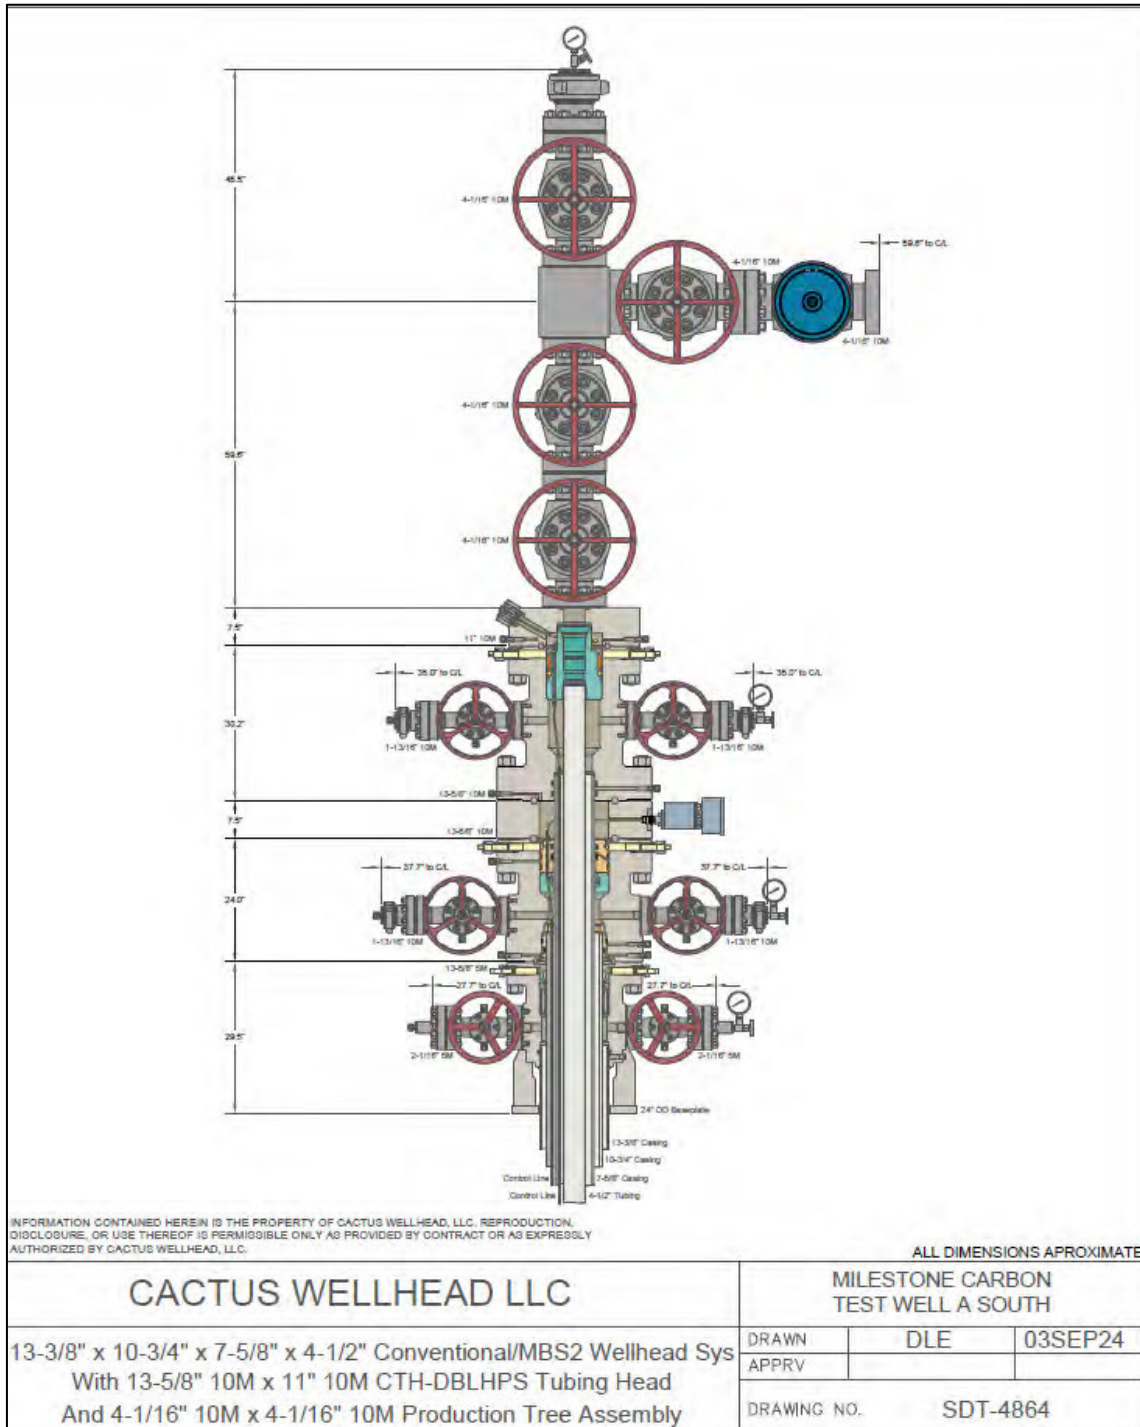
Midland CCS #2 Well Preliminary Wellhead Design
